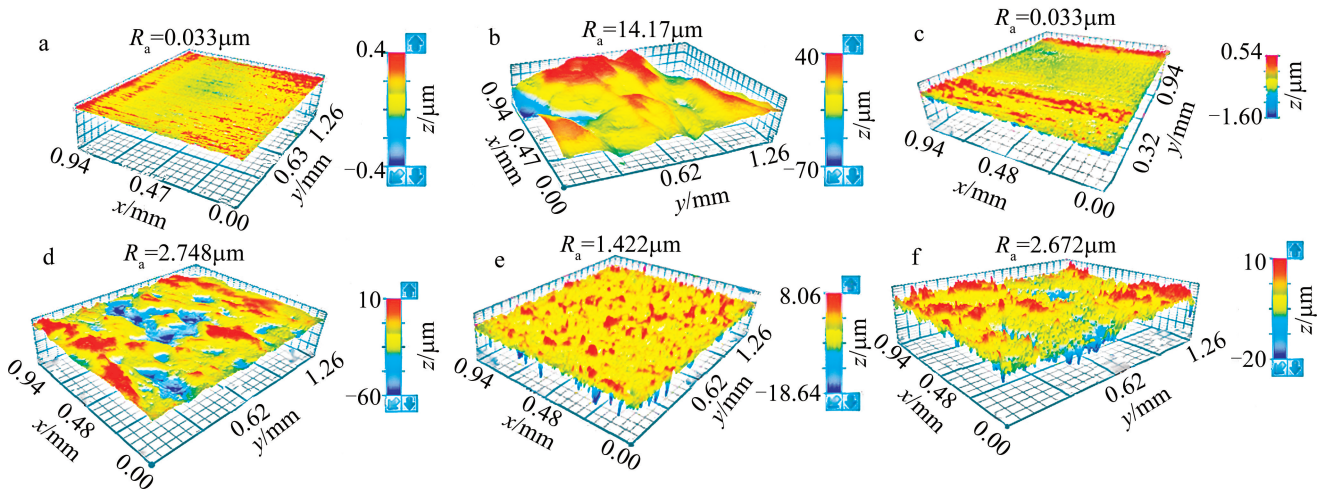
3-D surface morphologies of Mo-doped CoCrNi alloy samples prepared by laser deposition, hot forging and hot forging sandblasting before and after fracture
